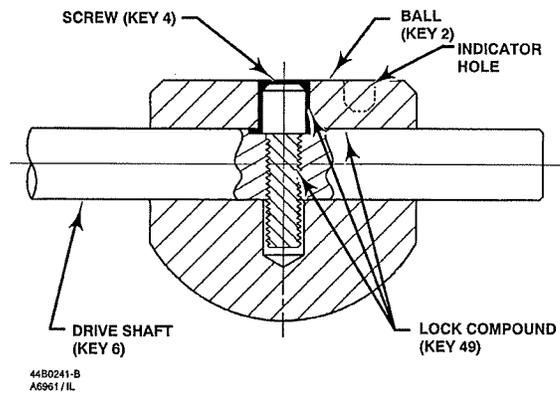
Screw Installation for Design V200, Size 1-Inch Valves with VTC Ceramic Micro-Notch Ball Construction
